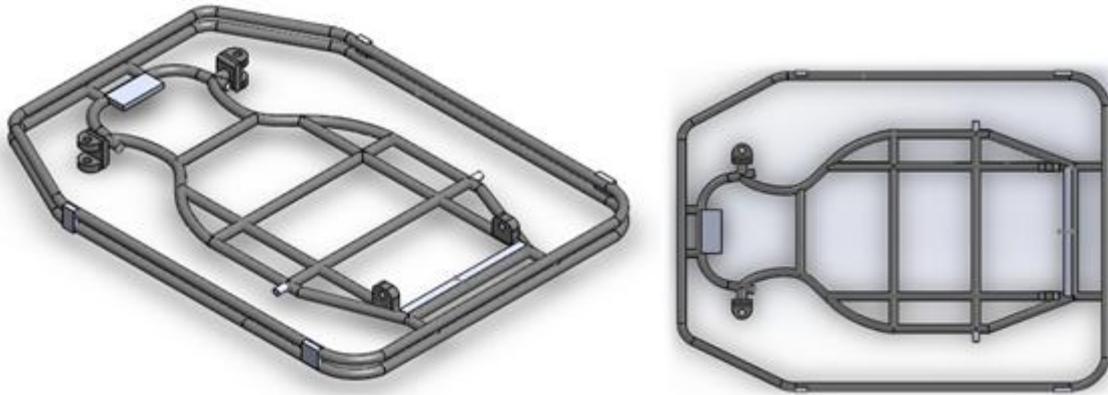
Roll Cage 3-D model (Isometric view and Top view)
